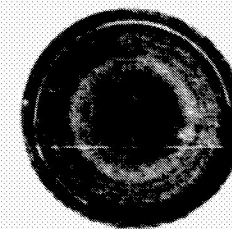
Posttest Appearance of Downstream Face of Loader Roller-Bearing Roller
